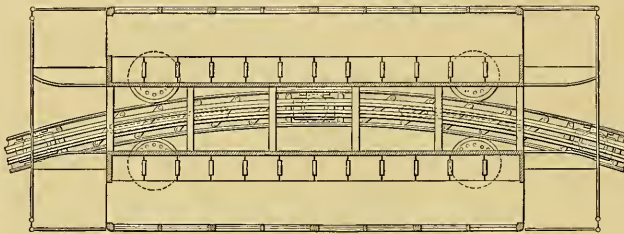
ADAMS' ELEVATED RAILWAY.
